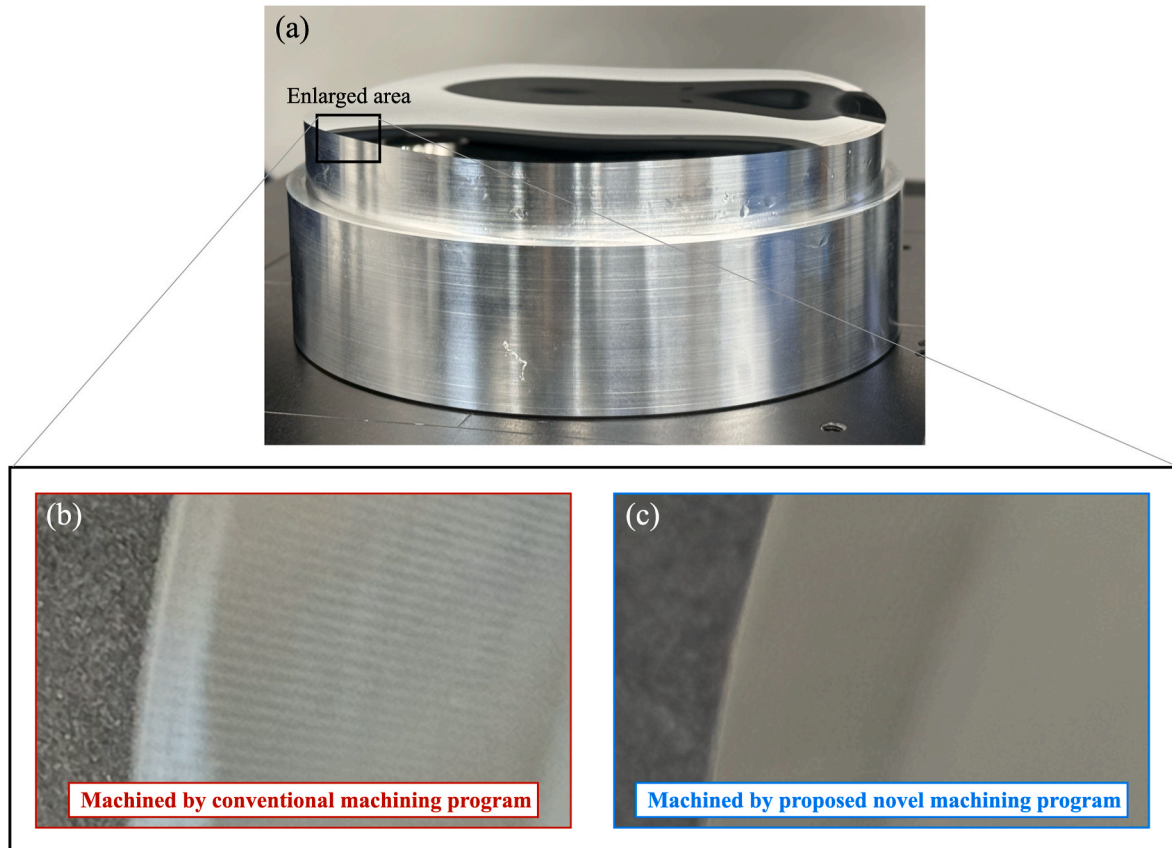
Photograph of the machined surface: (a) overall surface appearance; enlarged view of the machined surface obtained using the (b) conventional machining program and (c) proposed machining program.
